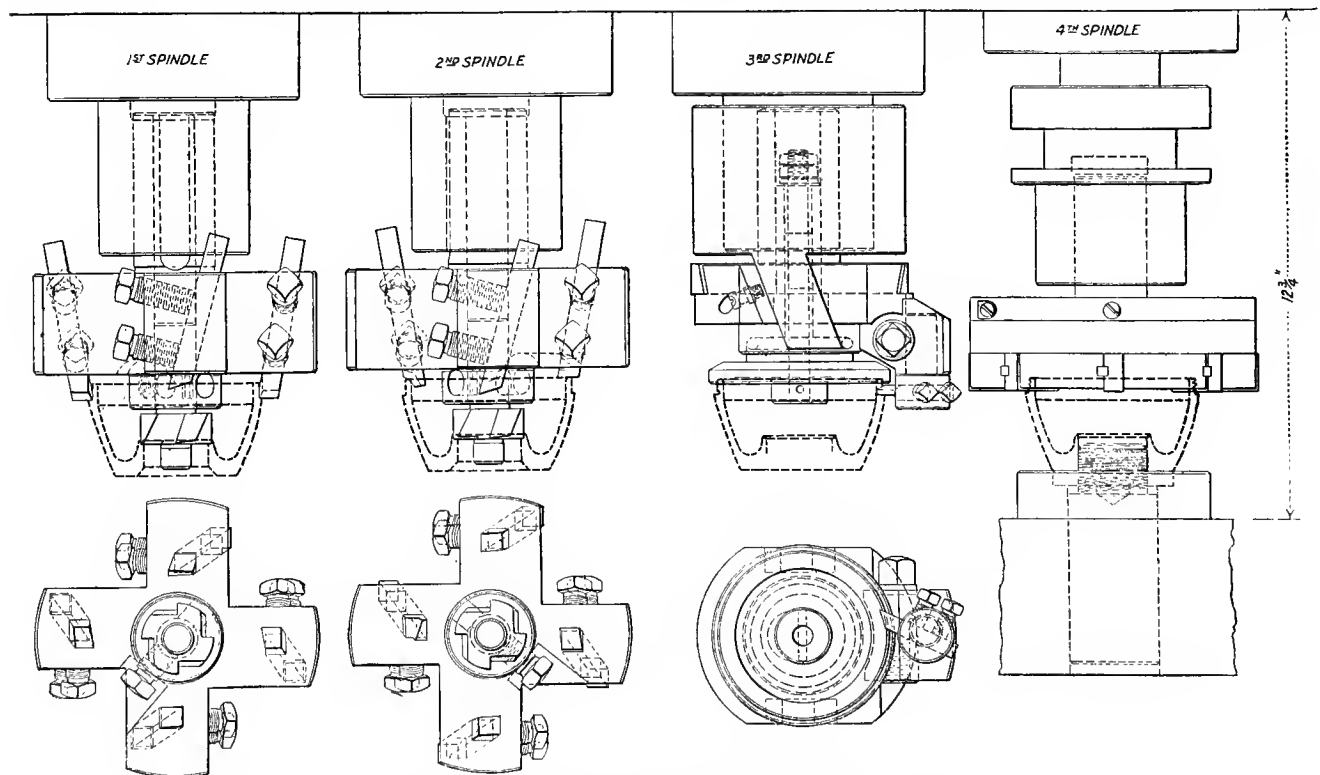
SECOND SETTING FOR SHRAPNEL HEAD
